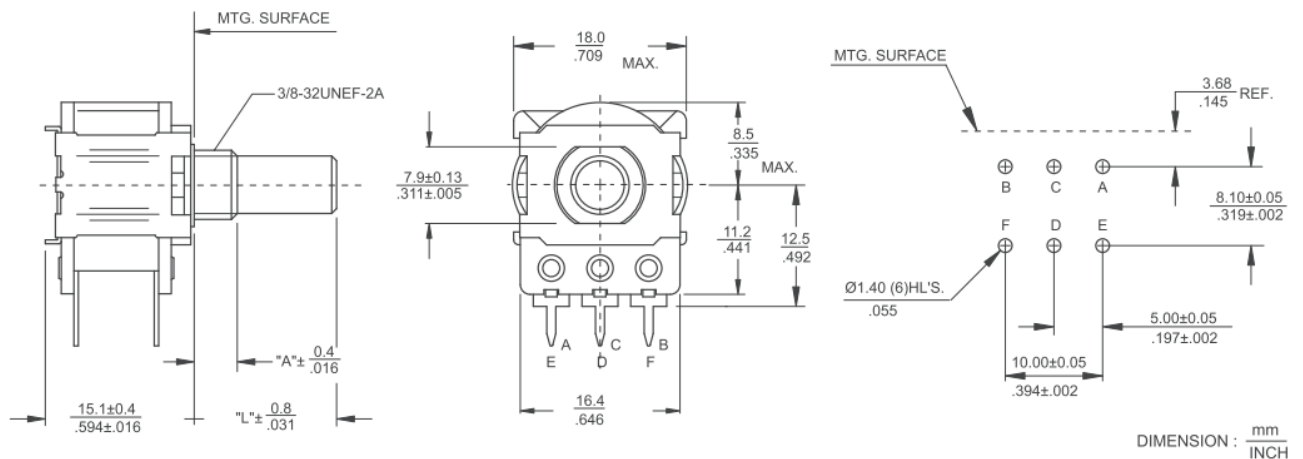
288T – Typical 2-bit Encoder With Solder Lug Terminals
